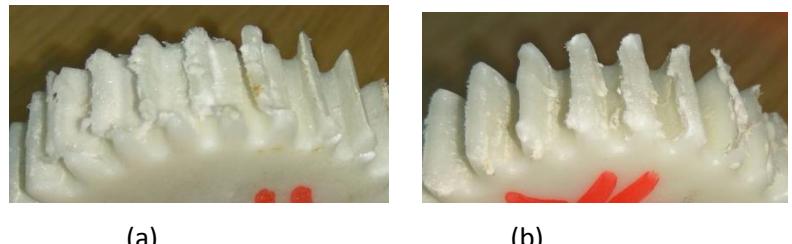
Tested GFR POM gears (a) the driver (b) the driven
